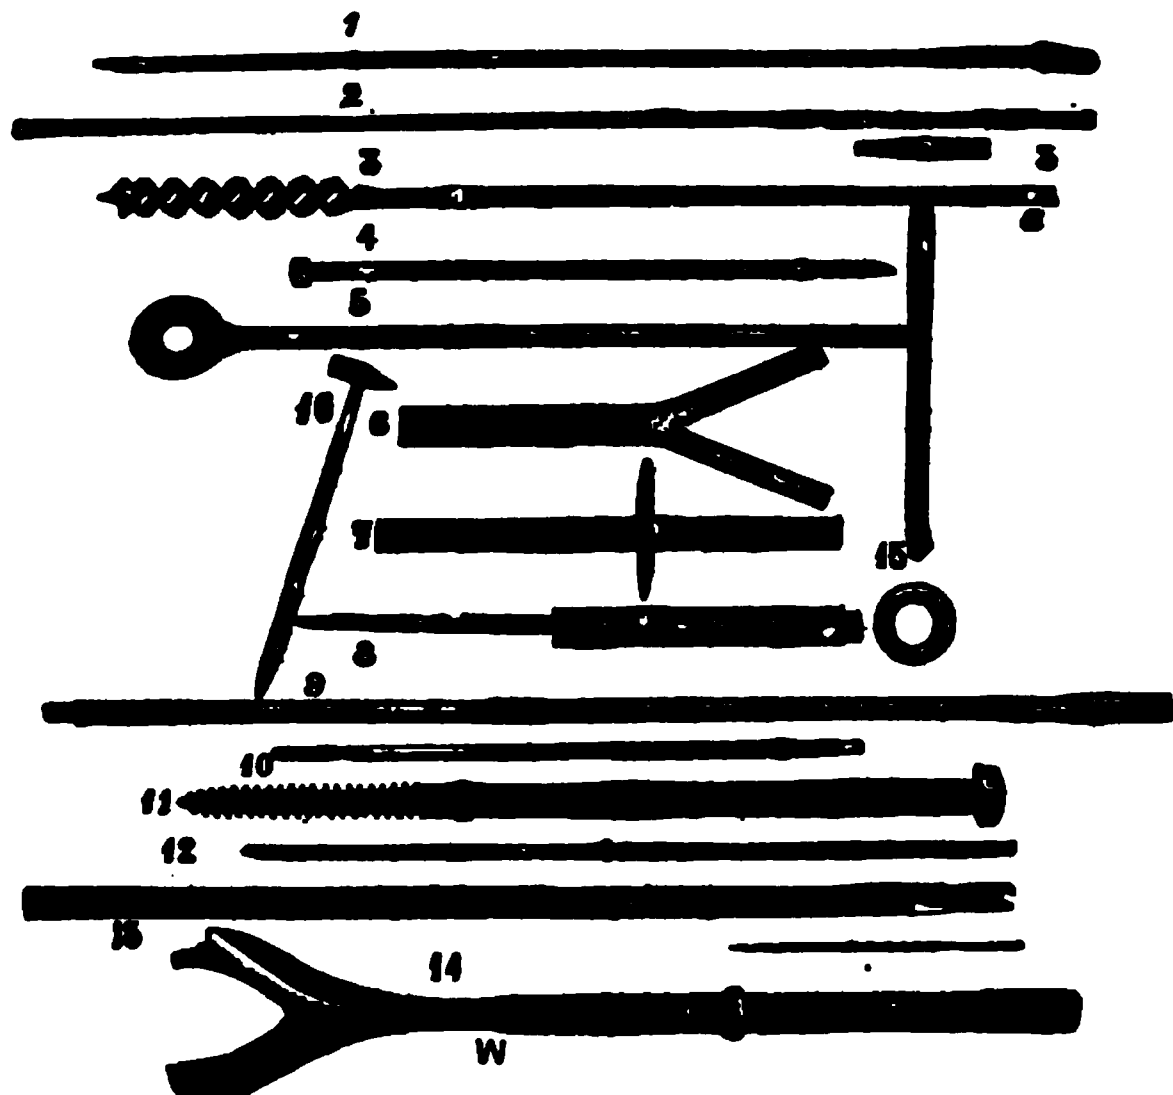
Specimens of Electrically Welded Taps, Drills, Augers, Bits, etc.
